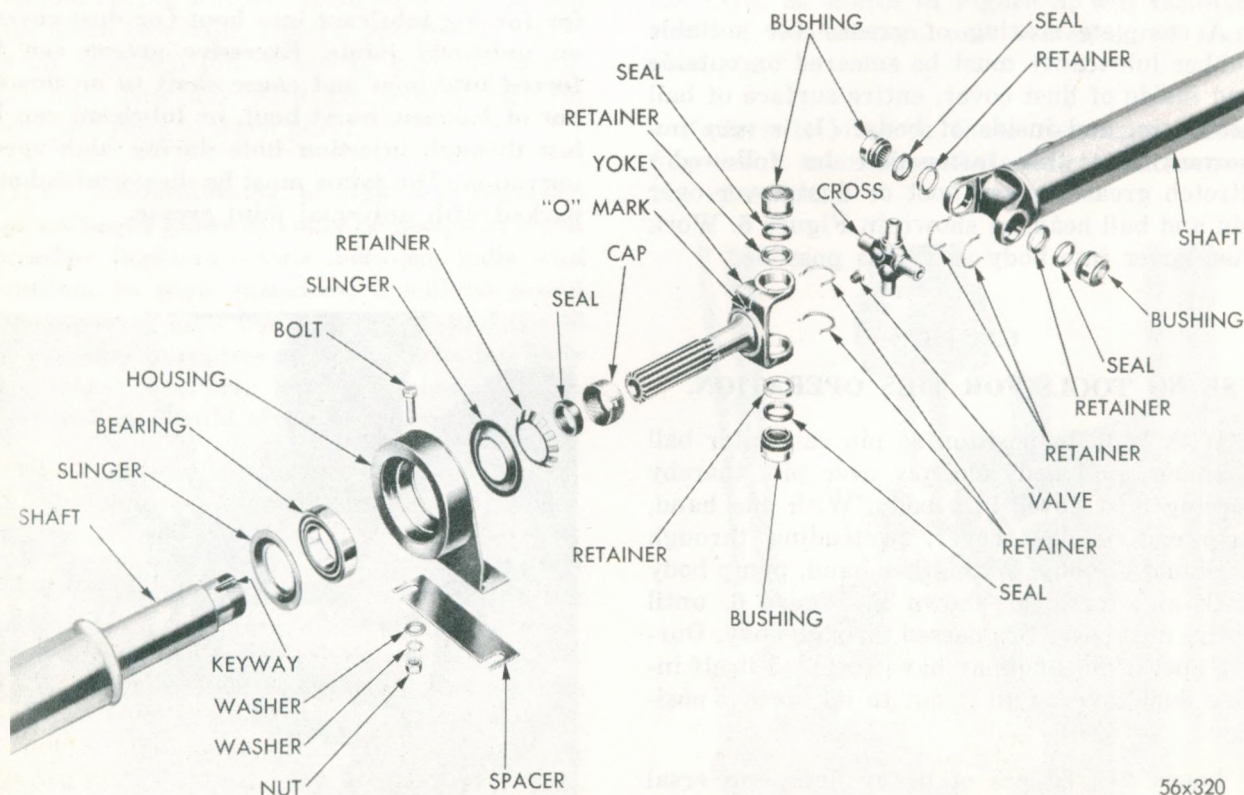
Propeller Shaft and Center Bearing Assembly (Disassembled View)
